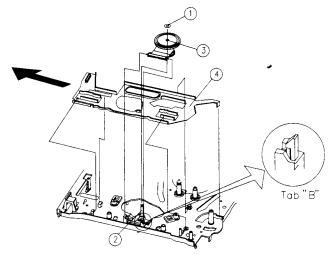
REEL GEAR TOTAL ASS'Y & CONNECT PLATE REMOVAL
